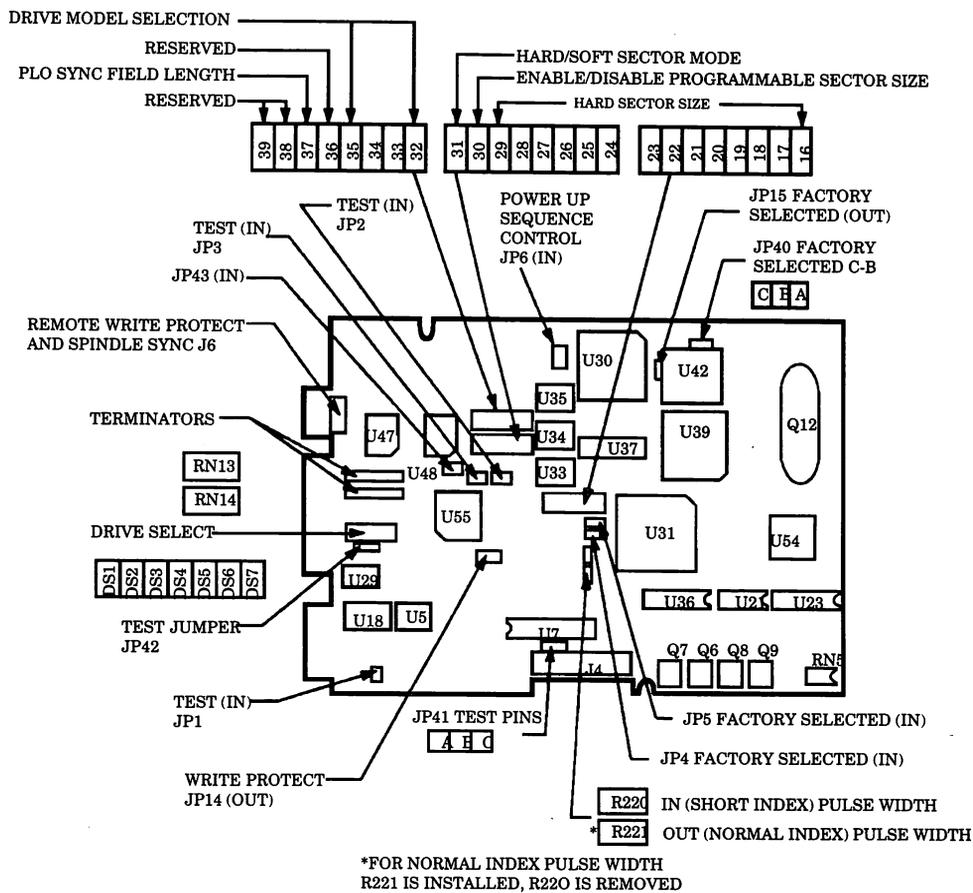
Drive Jumper Options (PCB P/N 1014150)
